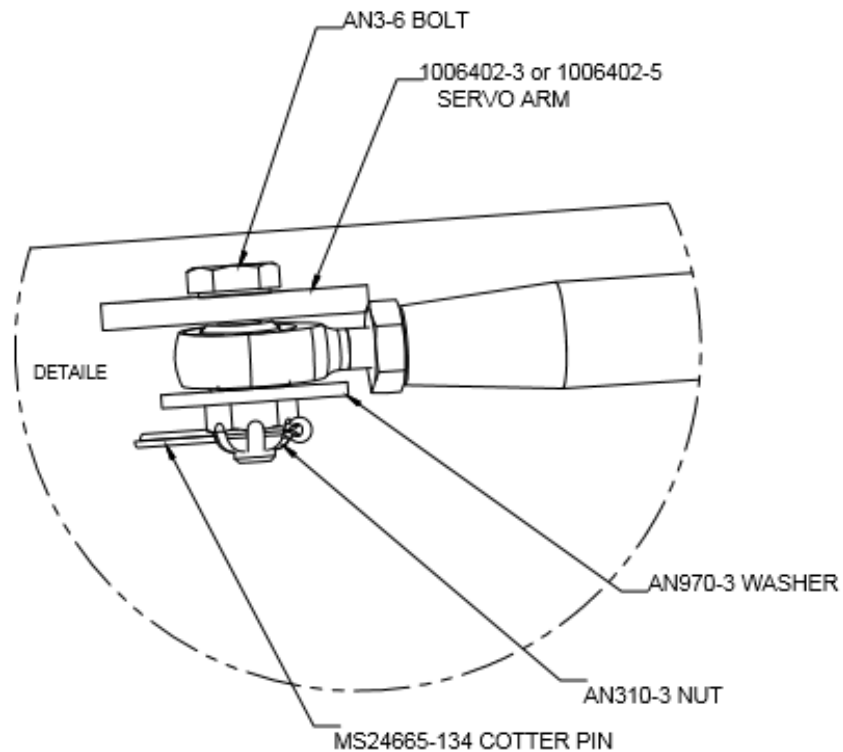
ROLL SERVO ARM INSTALLATION
